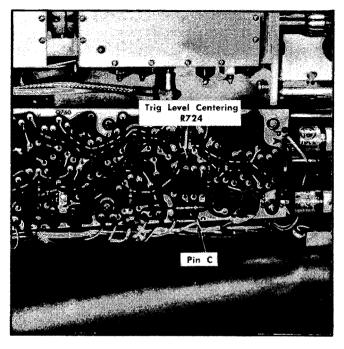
Adjustments for trigger circuit on the horizontal display circuit board assembly.
